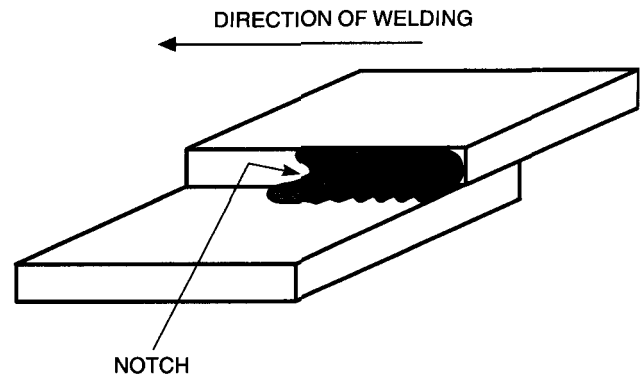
Be Sure to Fill the Notch that Occurs when Making a Lap Weld with GTAW
